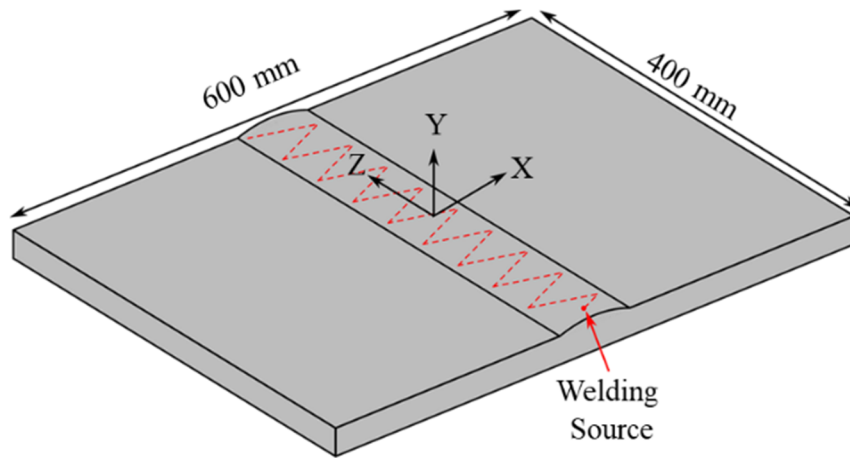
Diagram of COMSOL domain for a fully-filled weld with dimensions, co-ordinate system and welding heat source path indicated
